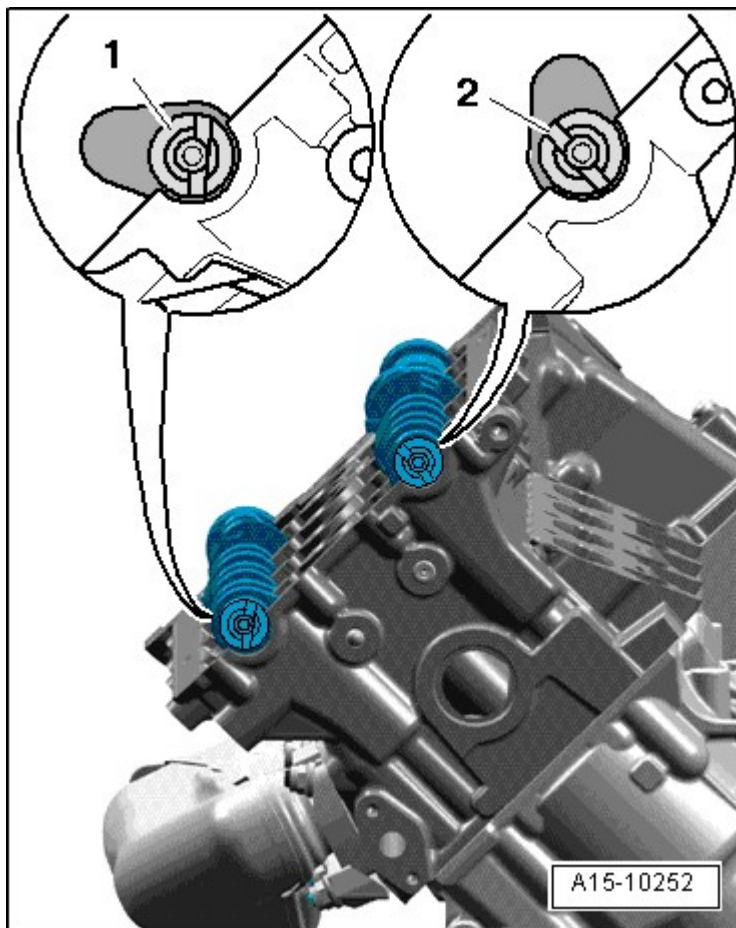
Identifying Intake Camshaft & Exhaust Camshaft (Right Cylinder Head)
